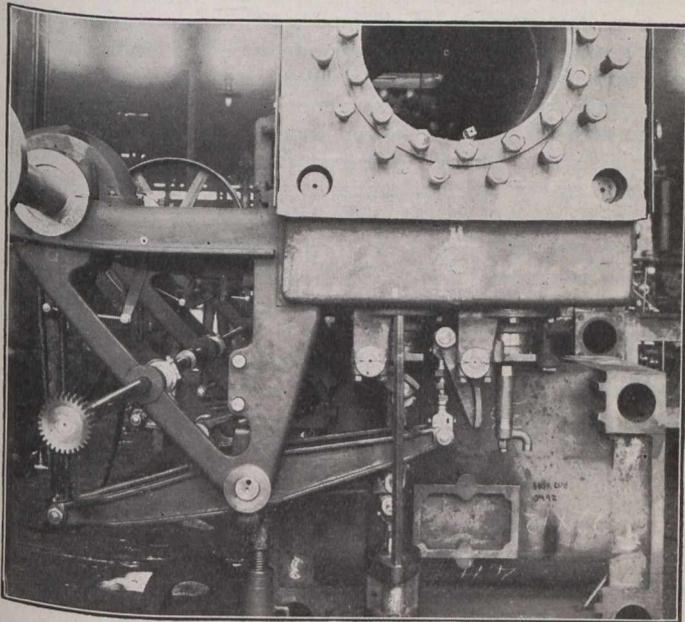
Valve Gear, with Exhaust Valve Cam in "Pause" Position.
